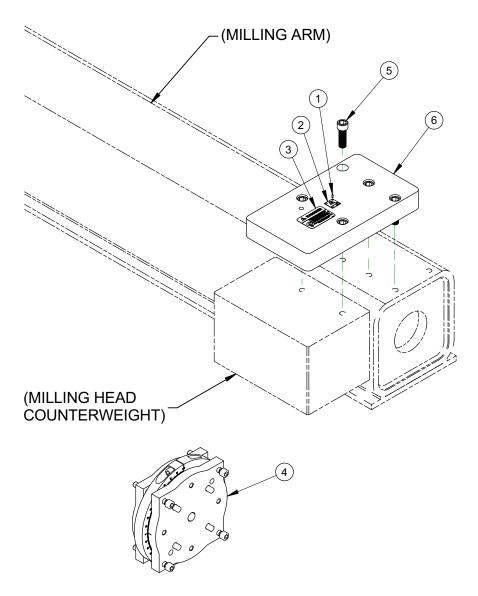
SURFACE MOUNT ASSEMBLY (P/N 79540)
